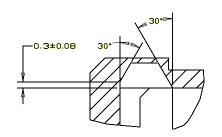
Slimline device plug connector interface dimensions (detail F)
